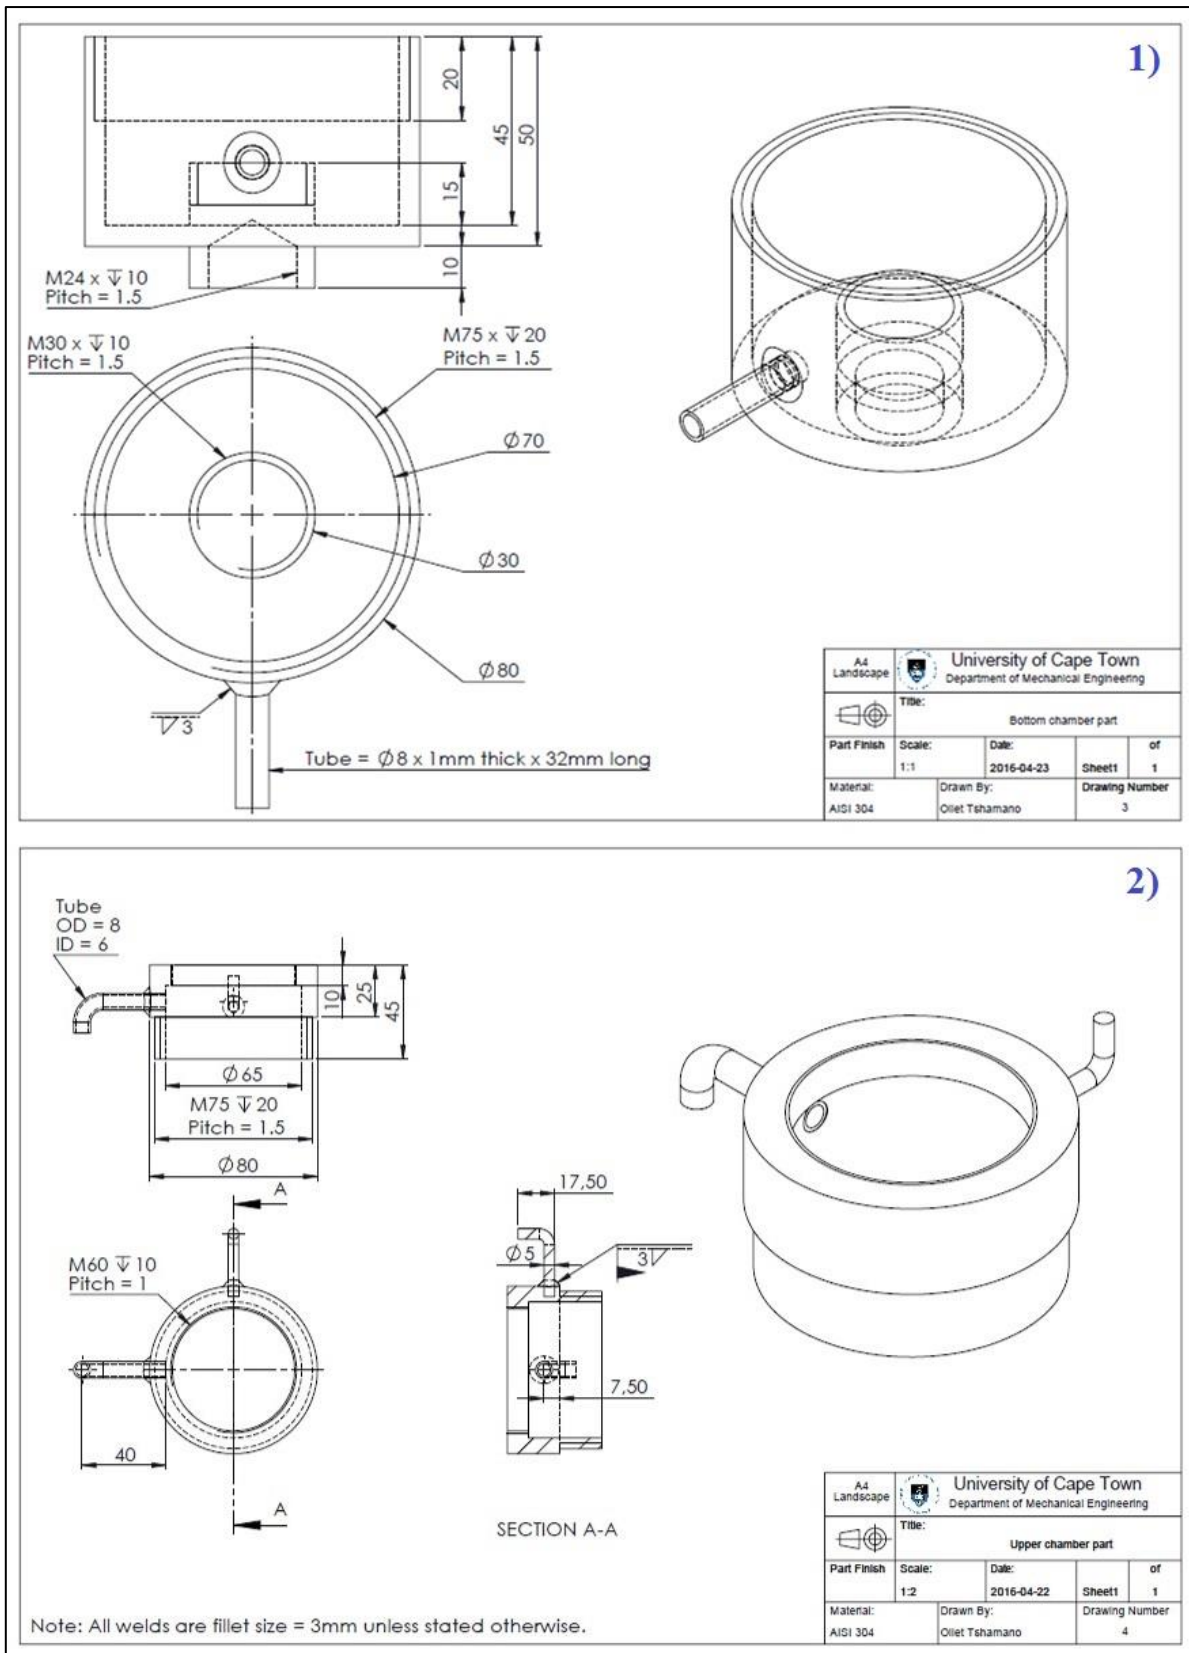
1) Bottom chamber part and 2) upper chamber part
